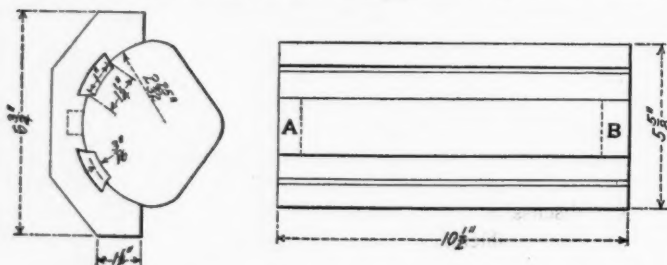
Mandril for Babbitting Engine Truck Bearings.
